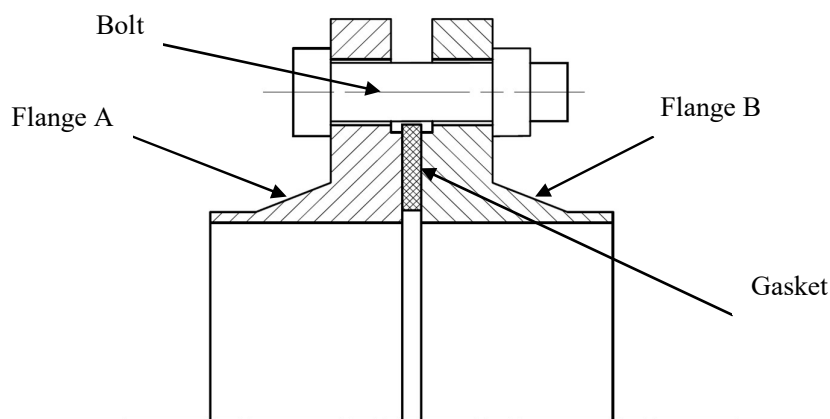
Sketch of a typical bolted flange joint with a flat gasket.
